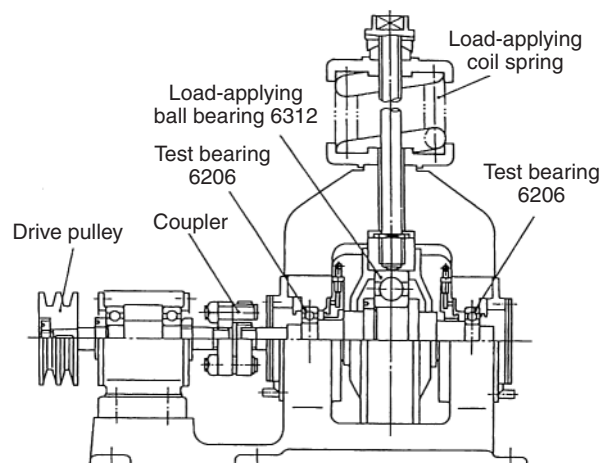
NTN rolling contact fatigue test rig for ball bearing
